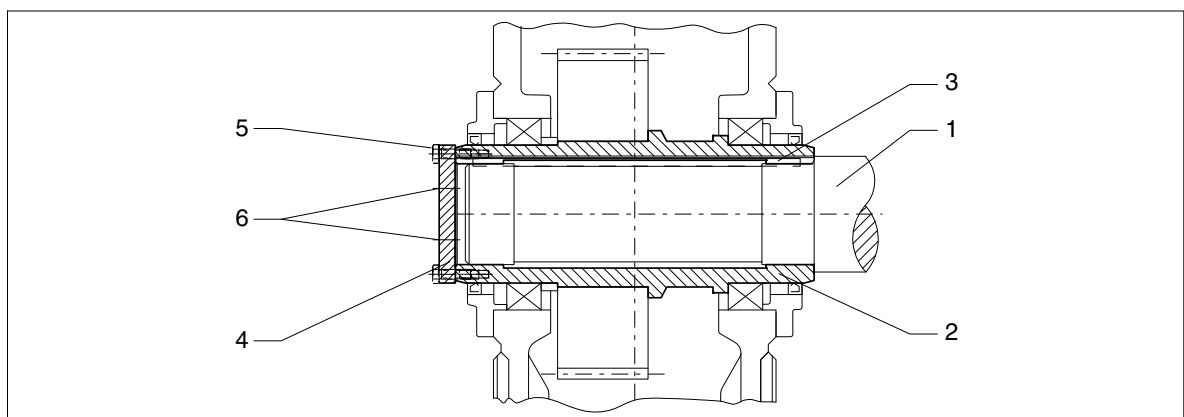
Hollow shaft with parallel keyway, demounting with end plate
